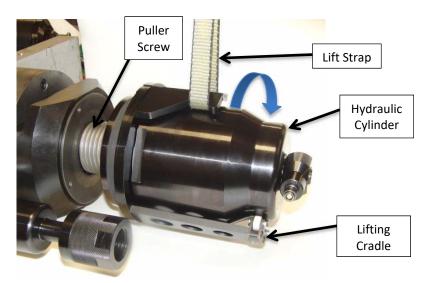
C – Thread Hydraulic cylinder onto Puller Screw
